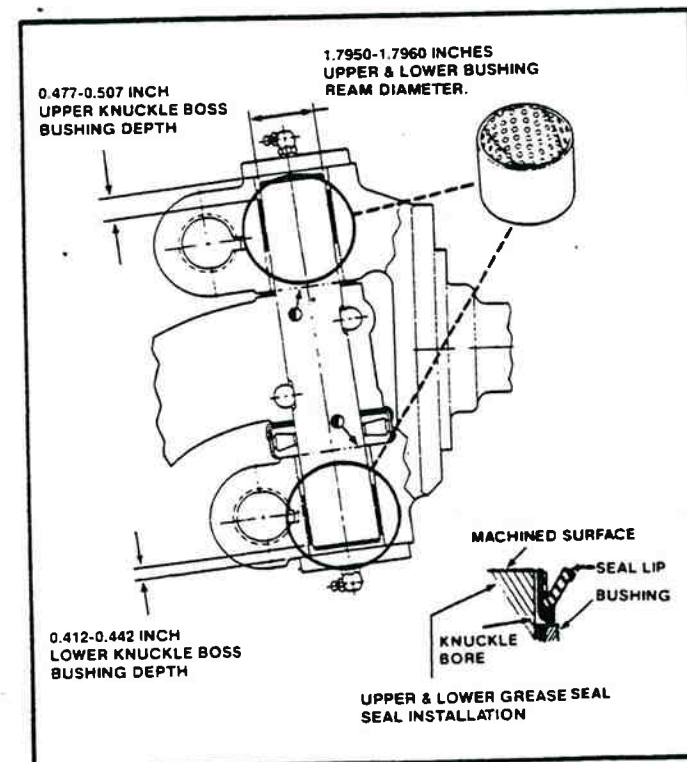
Easy Steer Bushing Installation and Grease Seal Installation.
